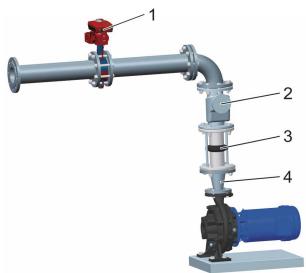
Layout of the pressure side (example: herborner.F-N)
